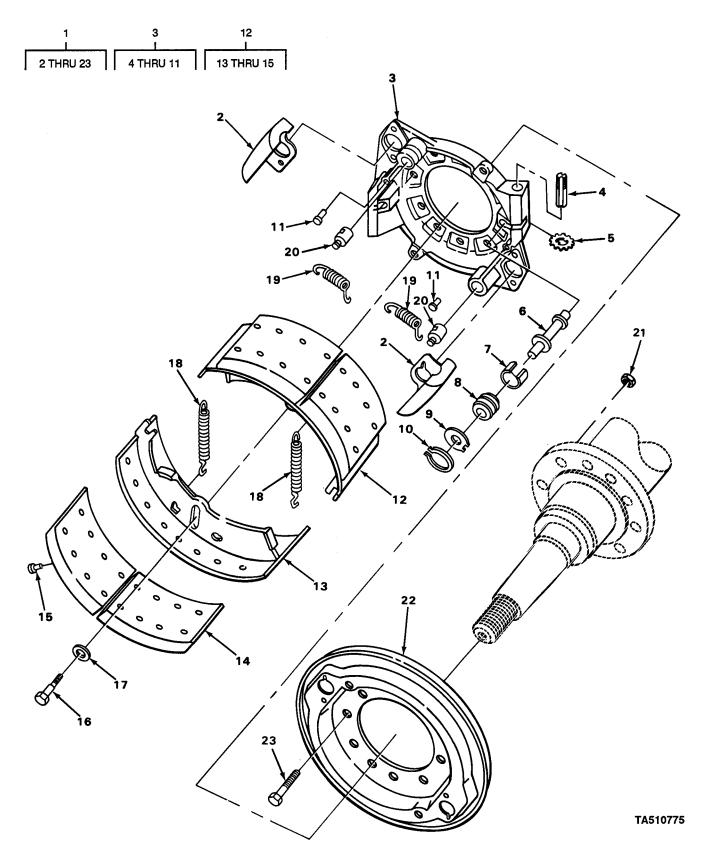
BRAKE AND SPIDER ASSEMBLY.
